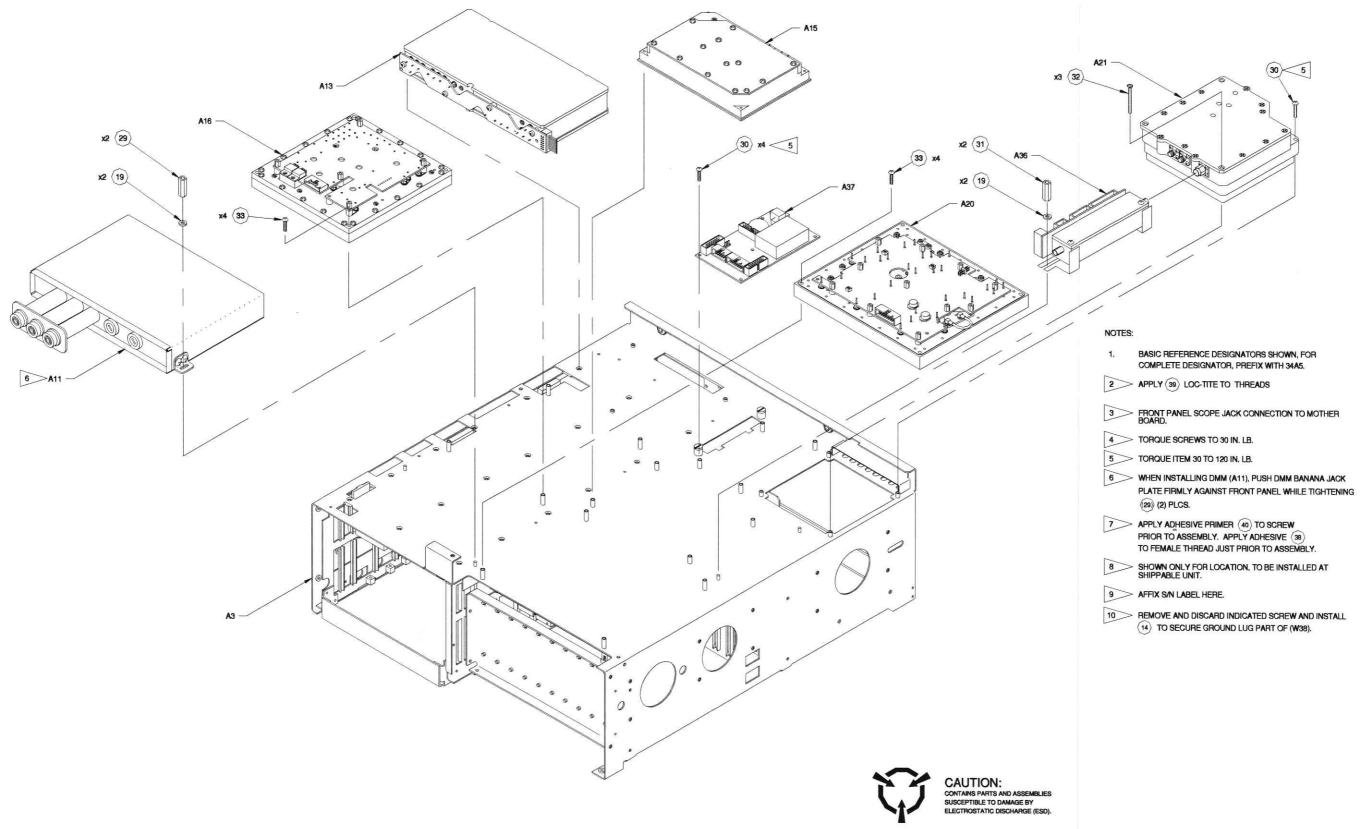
Test Set (34A5) Assembly, Cable Locator and Interconnect Diagram (Sheet 3 of 7)
